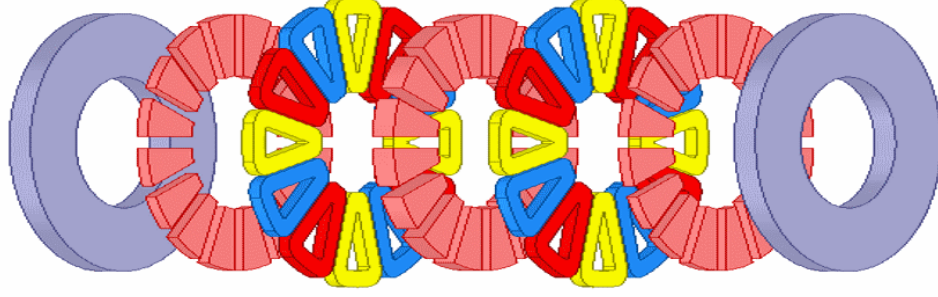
Exploded view of a coreless multi-disc axial flux permanent magnet machine with 2-stators and 3-rotors proposed to be used as a traction motor in the UK solar car. The stator includes coils placed in the airgap due to which the machine has a very low inductance.
